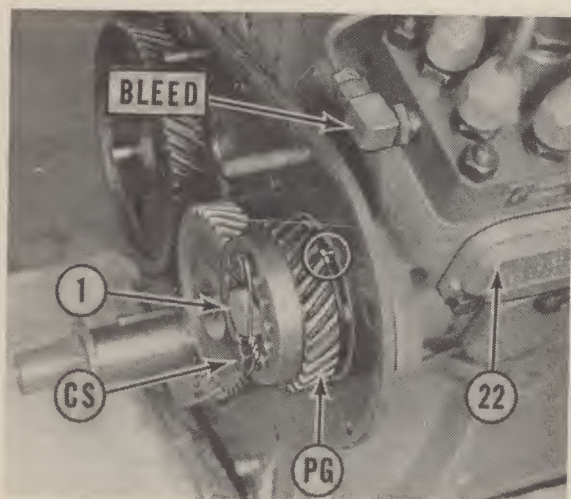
A—View of injection pump and drive with timing gear cover removed. Pump timing pointer is shown in circle. Note bleed line.
